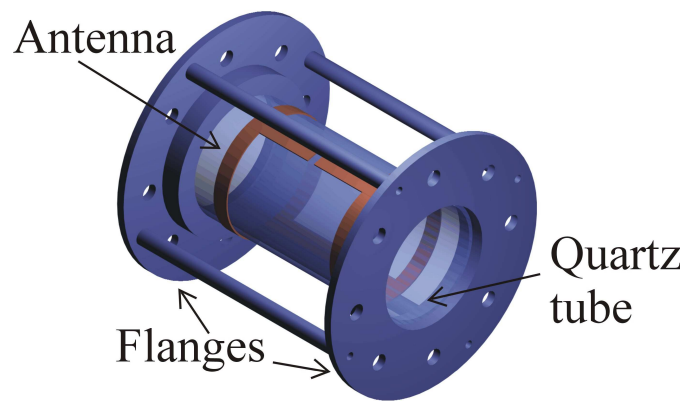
CAD drawing of the structure of the plasma source showing a helicon antenna mounted on the outside of a 150mm quartz tube together with supporting flanges that were bolted onto matching flanges on the vacuum chamber.
